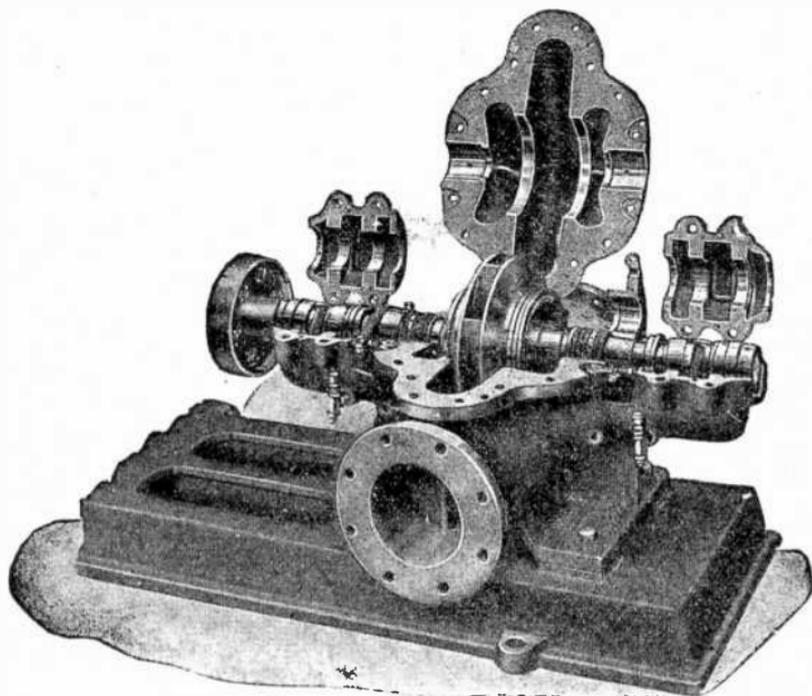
,908.—Economy single stage centrifugal pump with cover raised showing bearings and rotor construction
